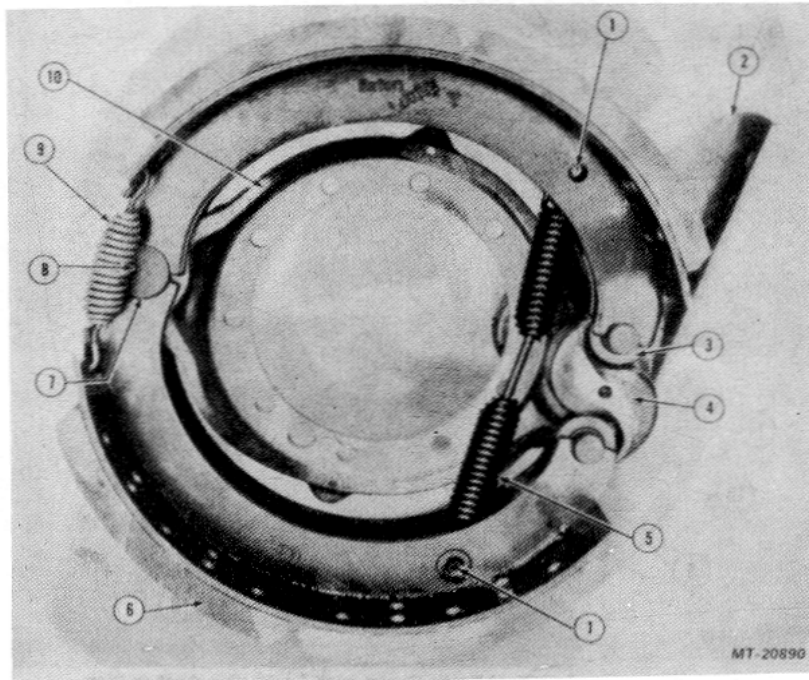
Typical Brake Group with Fixed Anchor Pins
